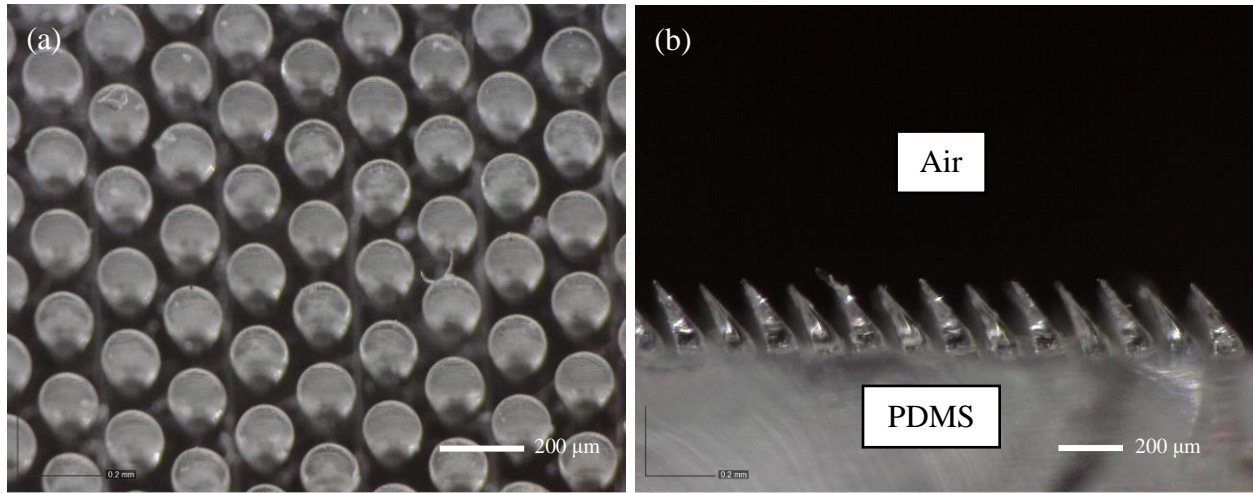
Positive mold of Modified tilted mushroom-shaped design. (a) Top view. (b) Cross-section view.
